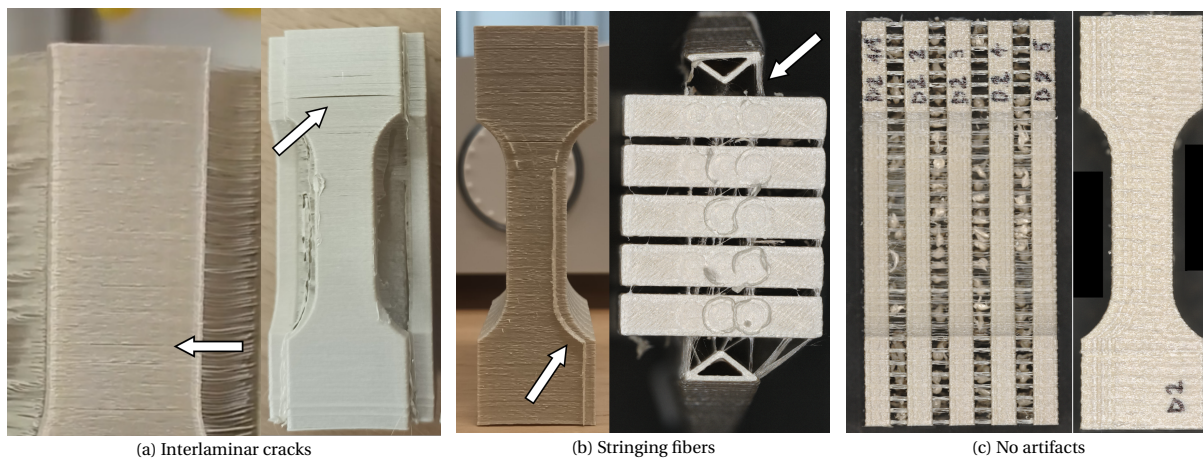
Undesirable features in printed specimen batches. (a) shows interlayer cracks observed in reference specimens during printing; arrows highlight the most prominent failures. (b) shows stringing lines formed between specimens, which made post-processing difficult. (c) Stringing was reduced to a minimum manageable amount.
